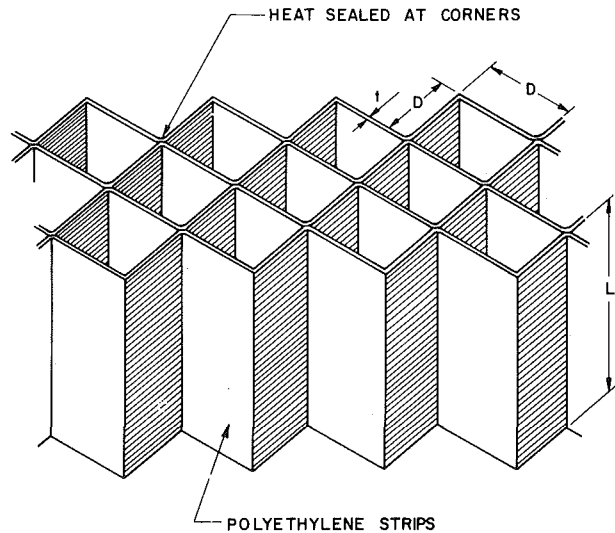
Figure showing dimensions and method of fabricating square-celled honeycomb
